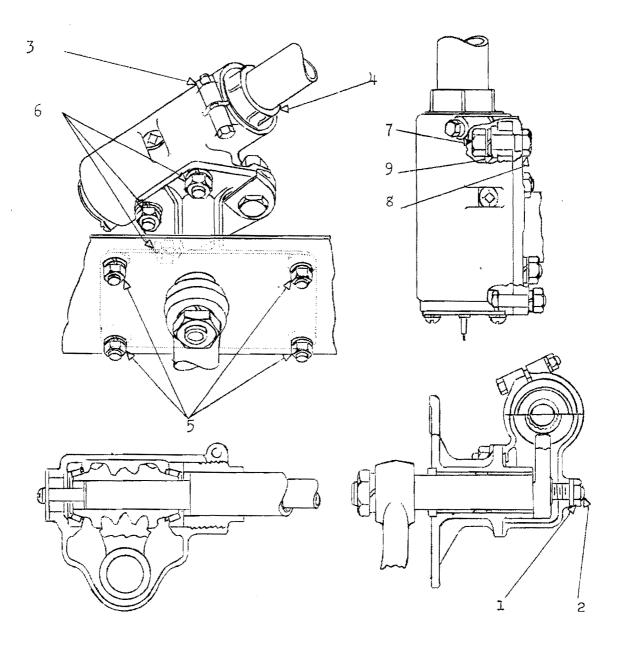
Typical Sectional View of Steering Gear Showing Mounting and Adjustments
